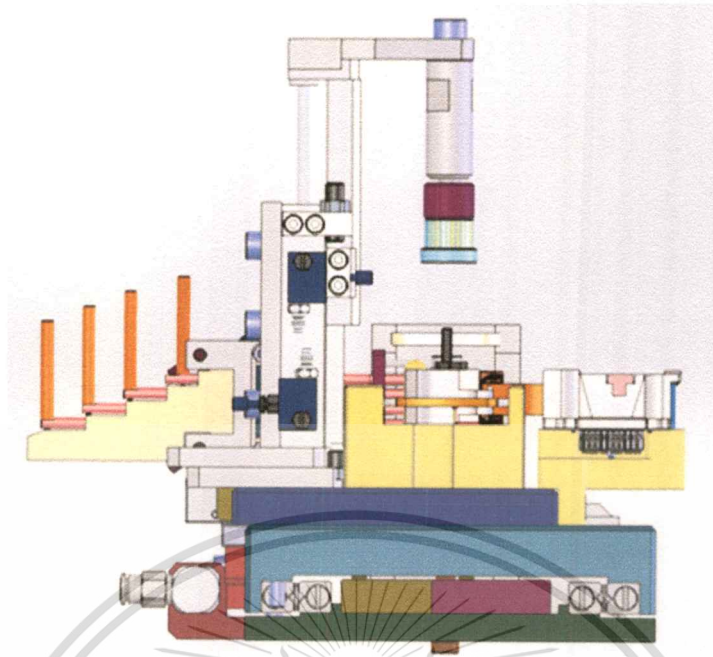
Side view of the tester shows spreader pin tower assembly
